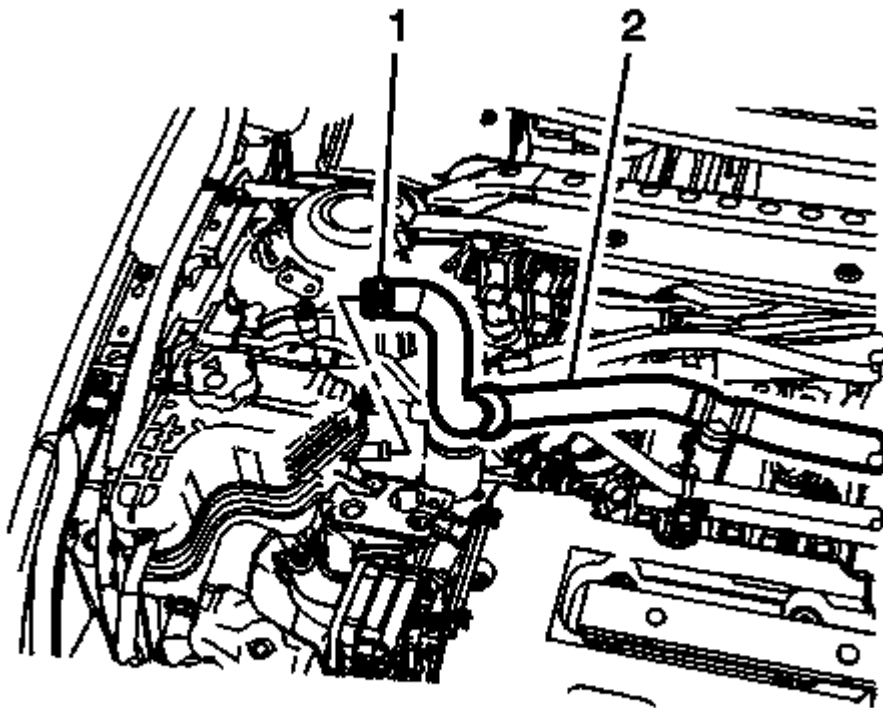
Heater Water Auxiliary Pump Inlet Hose And Clamp
